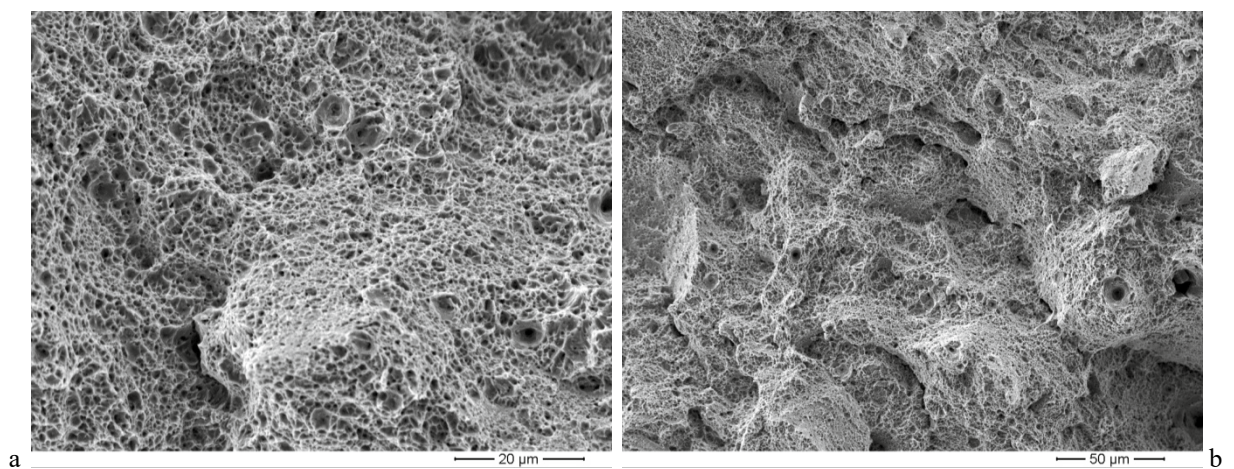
Fracture surface of a tensile specimen tempered at 320 °C. Electron microscopy. Central (normal) part. Ductile fracture (a, b).
